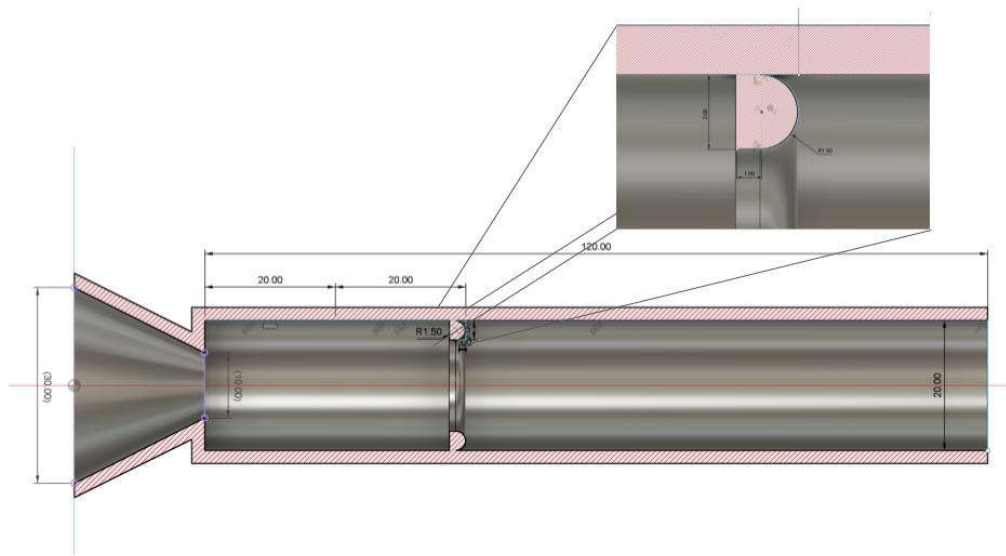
Nozzle and Duct Assembly with D-shaped Rib
